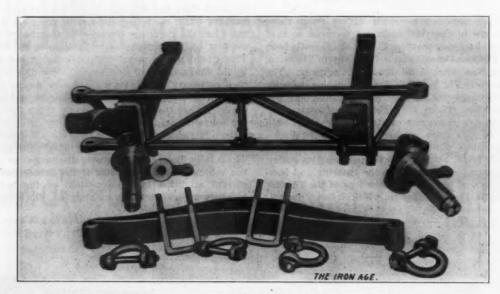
Front Axle, Steering Knuckles and Platform Spring.
